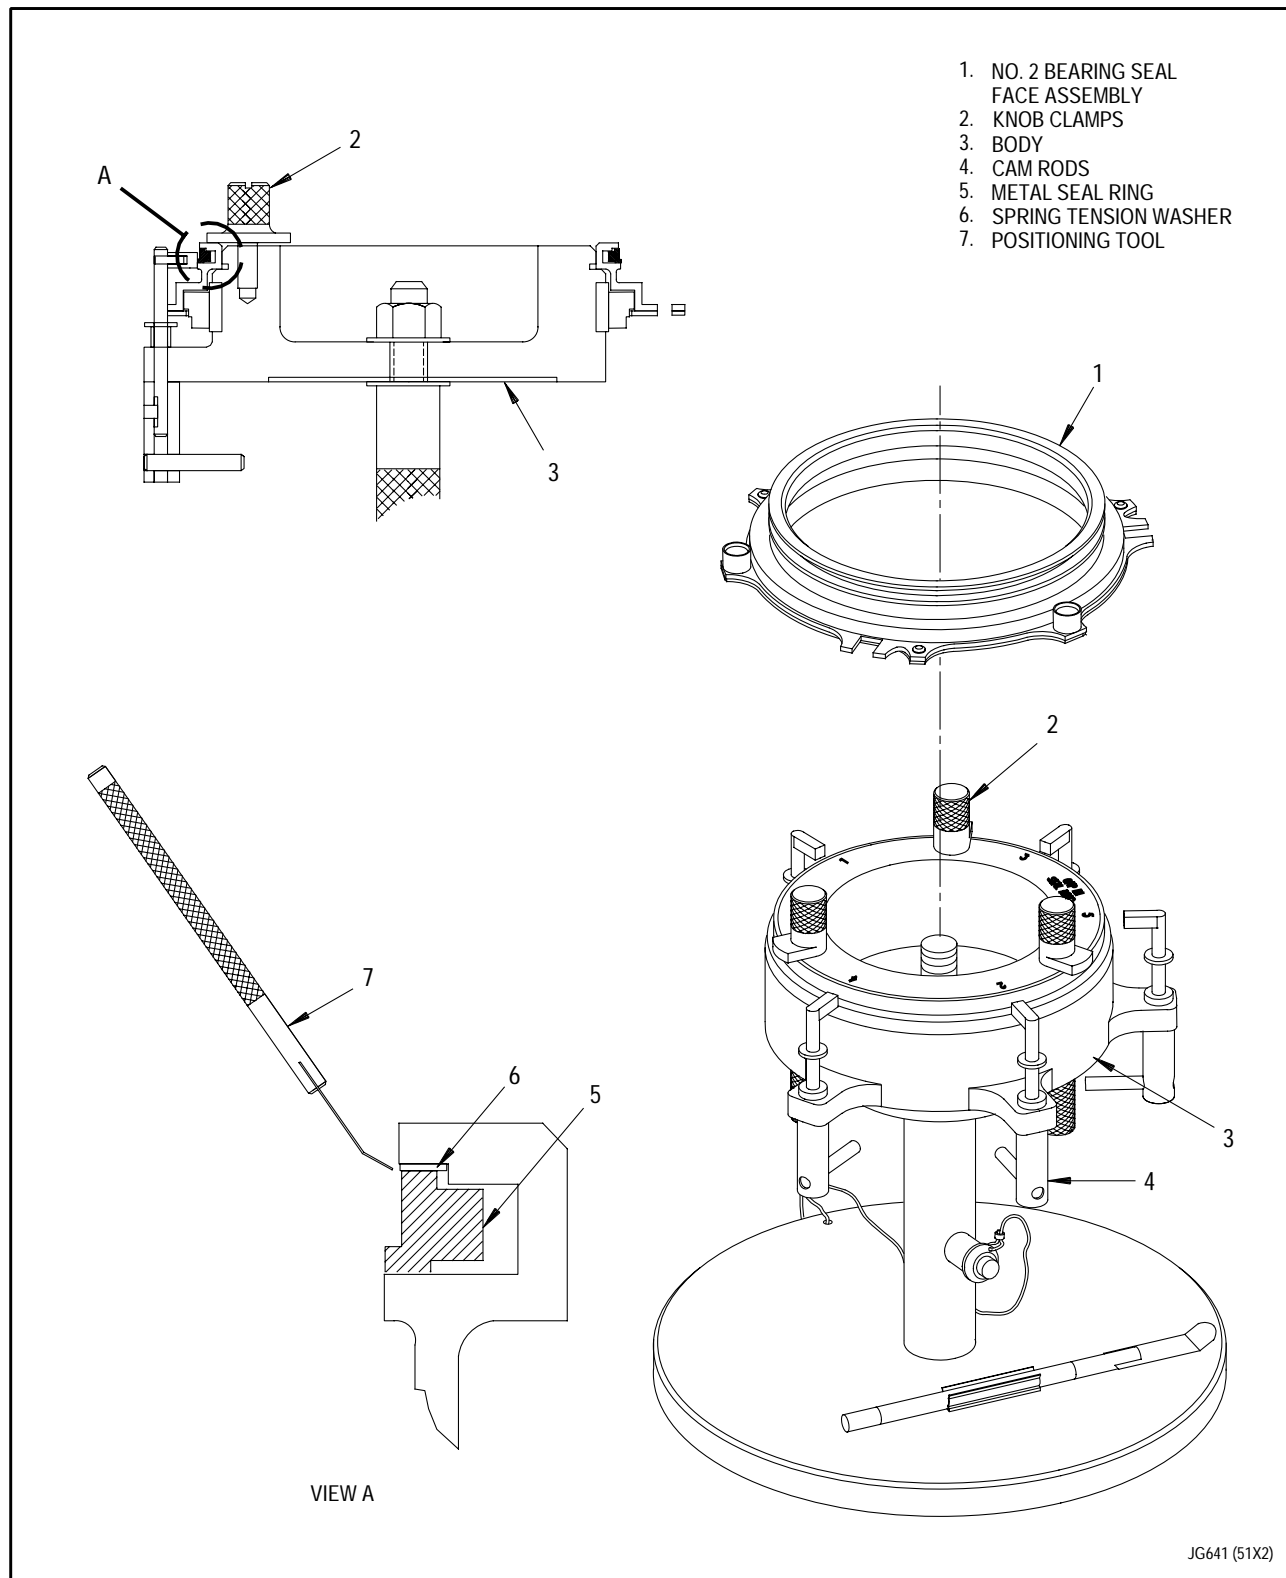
No. 2 Bearing Seal Face Assembly - Installation Into PWA 57433 Ring Compressor
